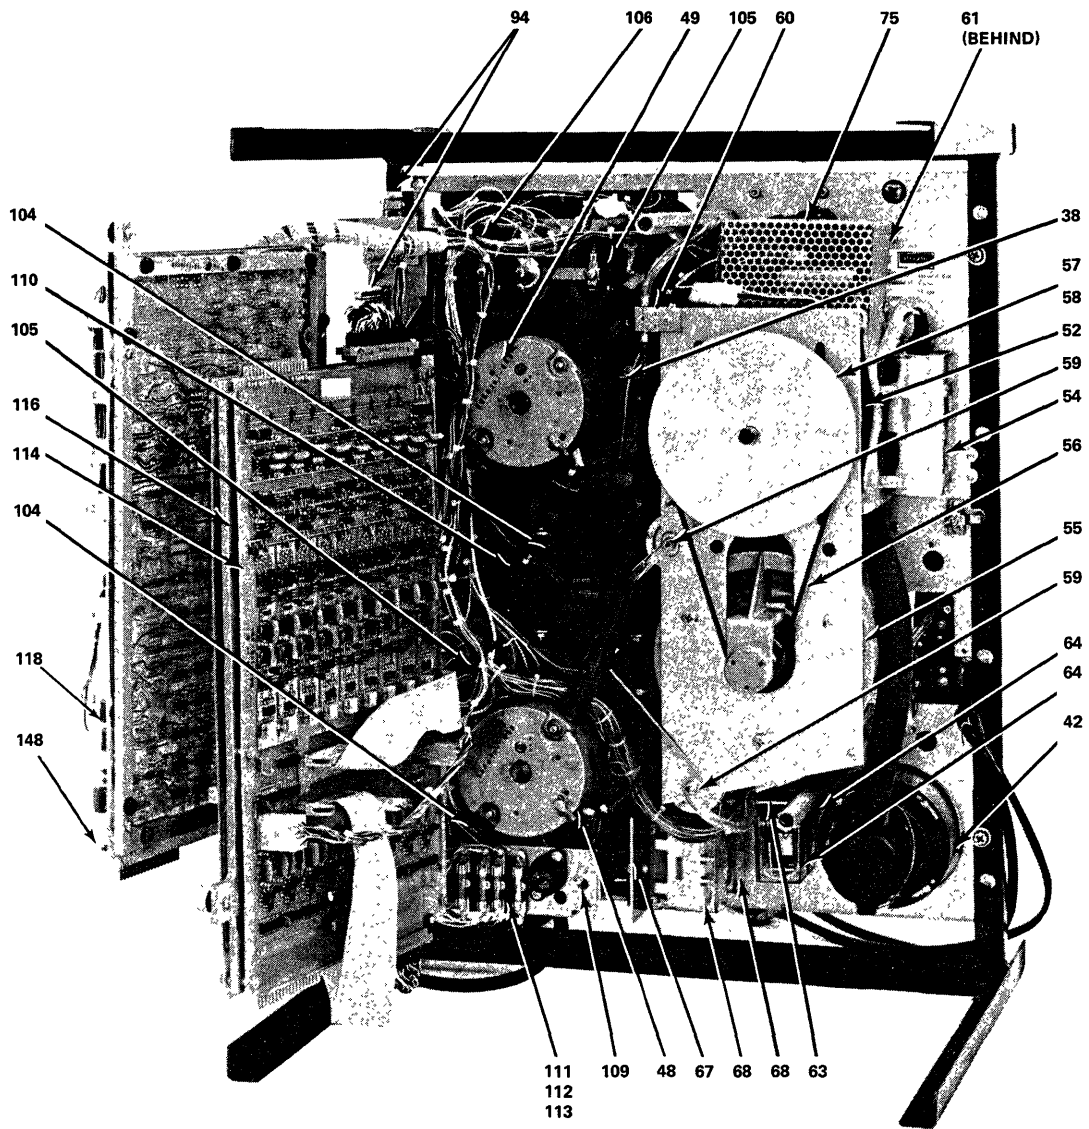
Model 2760 Parts Location, Rear View (Two Data Card Tape Unit)
